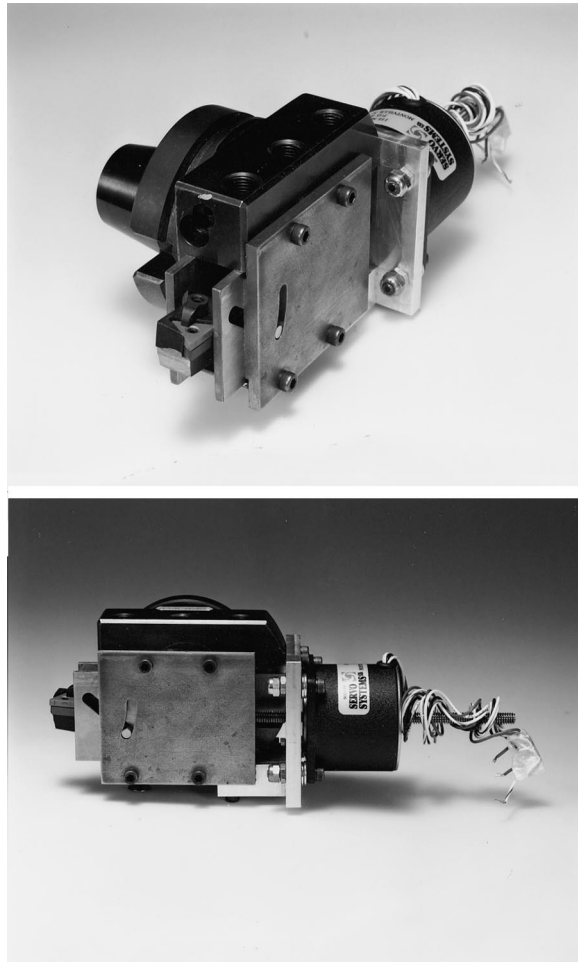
Photo of the actual prototype of the new CNC tooling mechanism.
